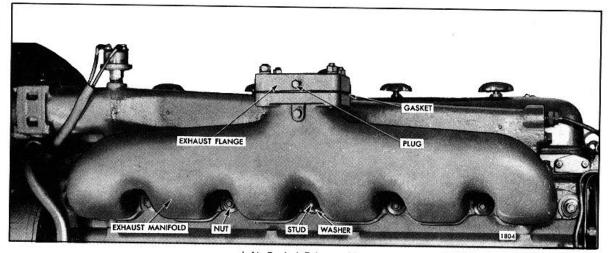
Typical Air-Cooled Exhaust Manifold Mounting.
